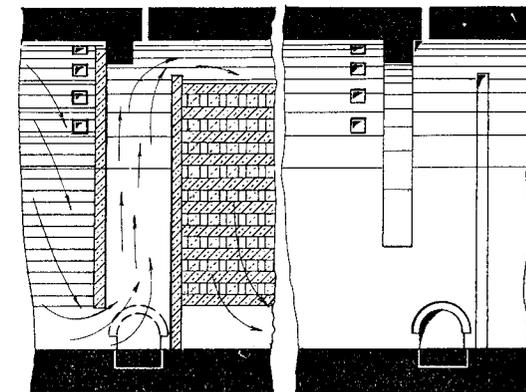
Method of setting to convert ring or tunnel kiln to a compartment kiln.
